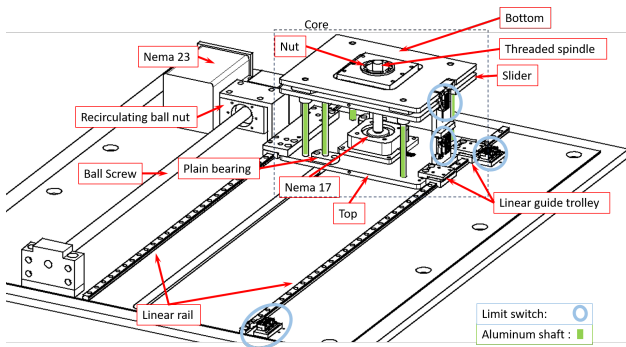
Drawing of the traversable hot-wire probe (lower side)
